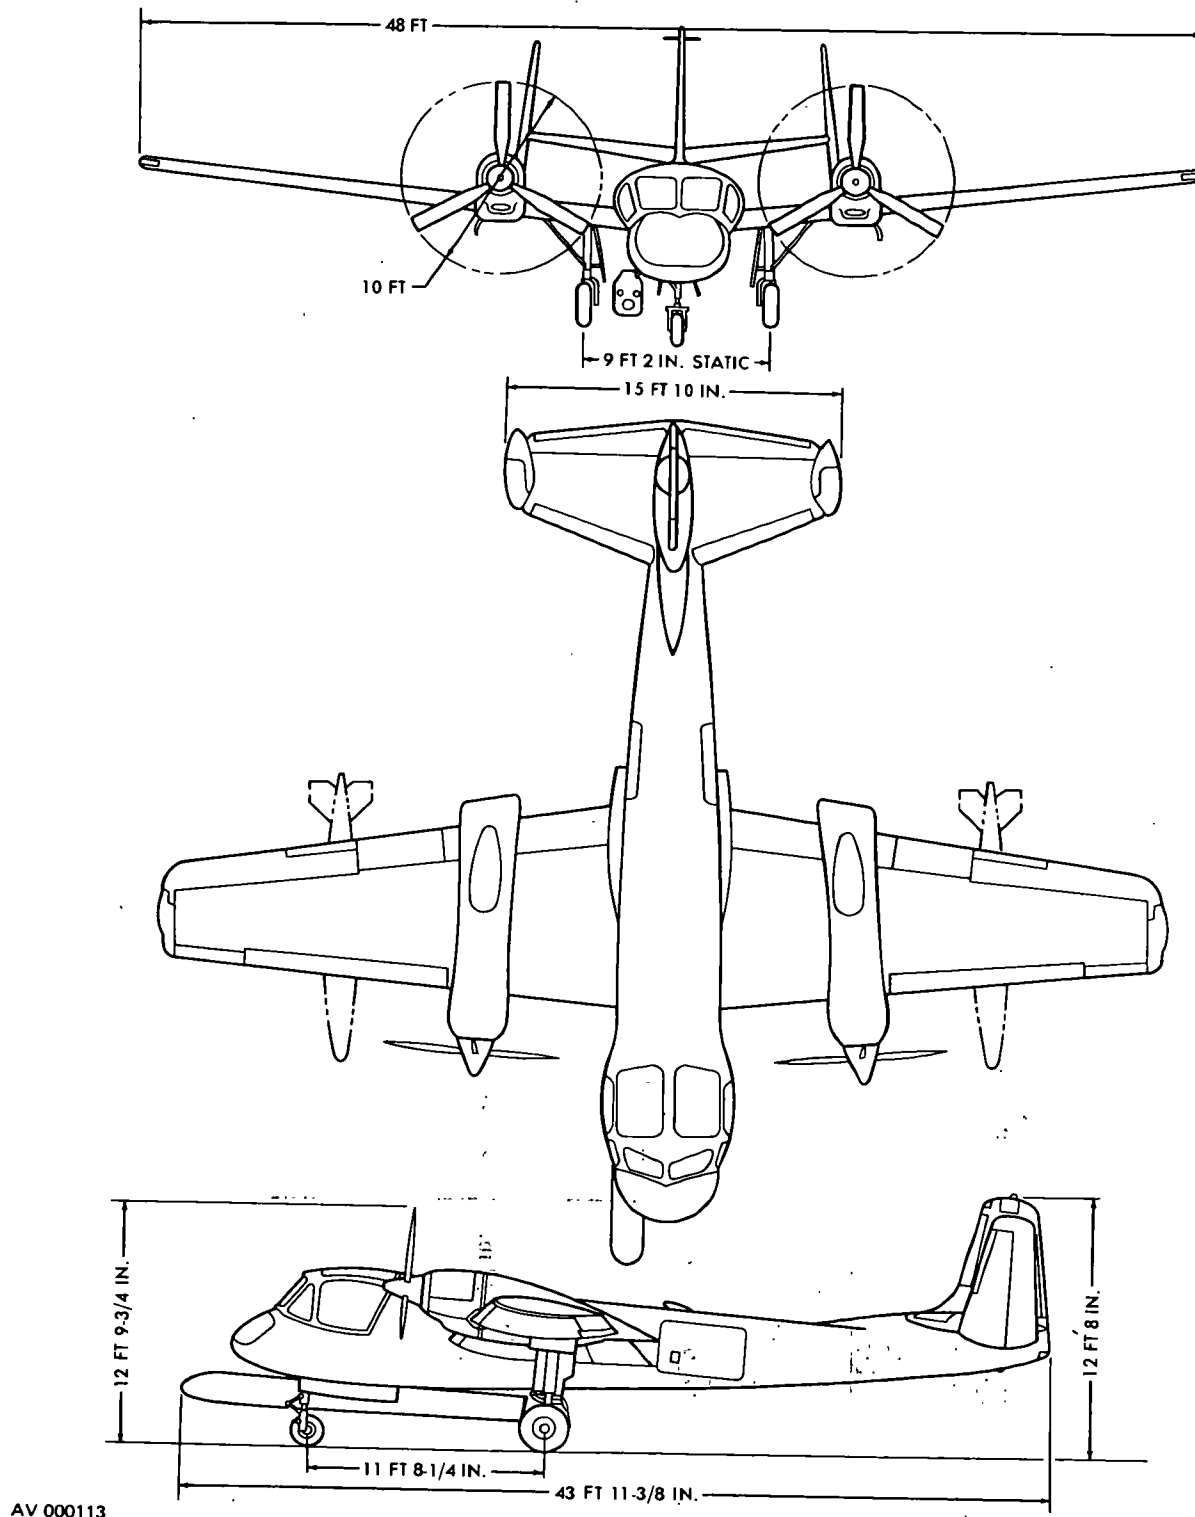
Principal dimensions, OV-1B (Mohawk)
